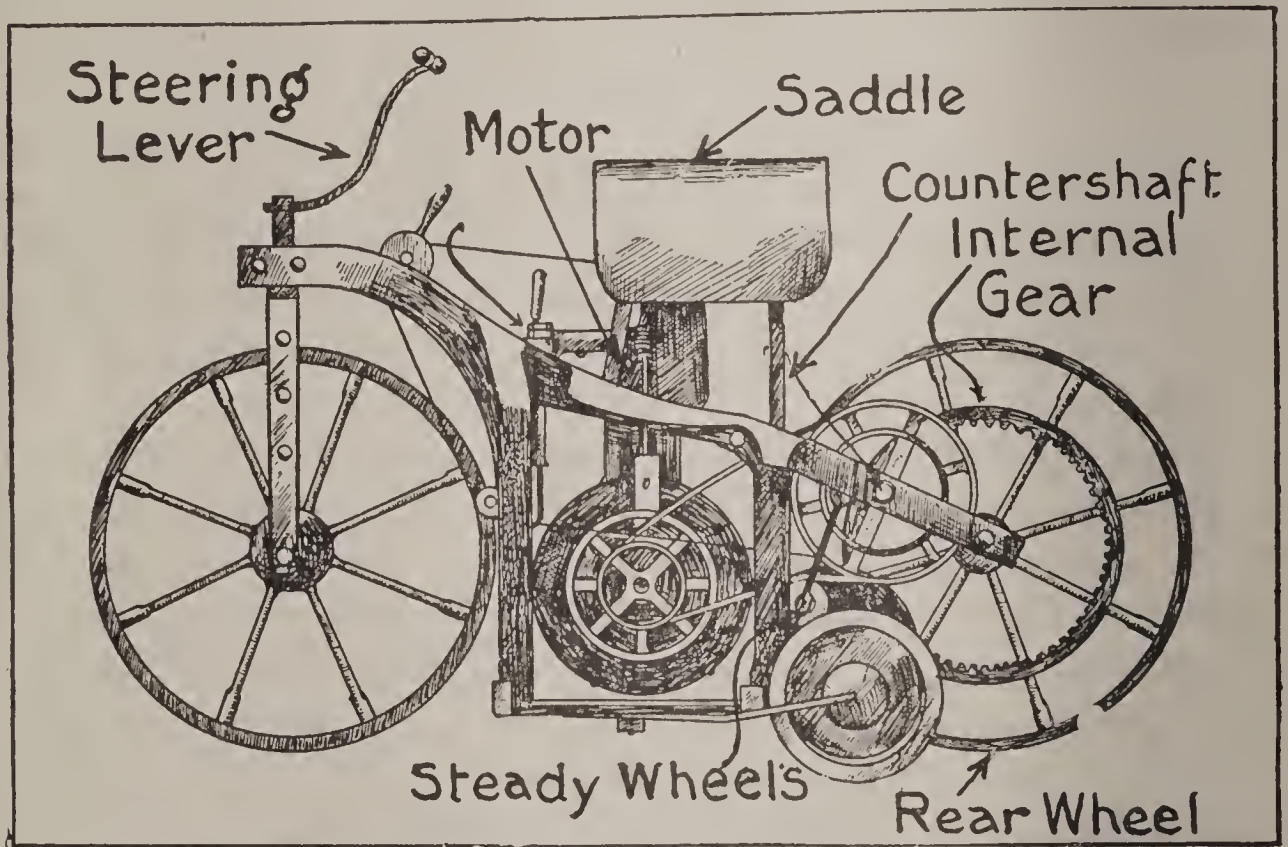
Early Daimler Motorcycle With Countershaft Drive.
